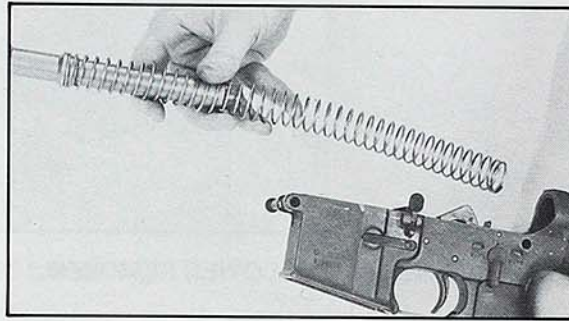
BUFFER AND ACTION SPRING REMOVAL
